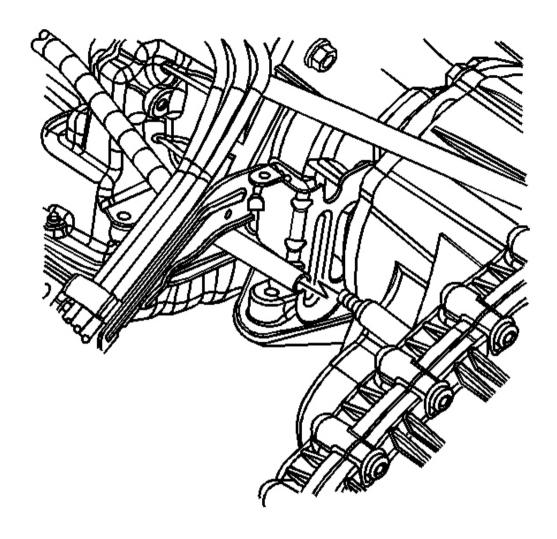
Removing Vent Hoses From Transfer Case & Transmission Courtesy of GENERAL MOTORS CORP.
